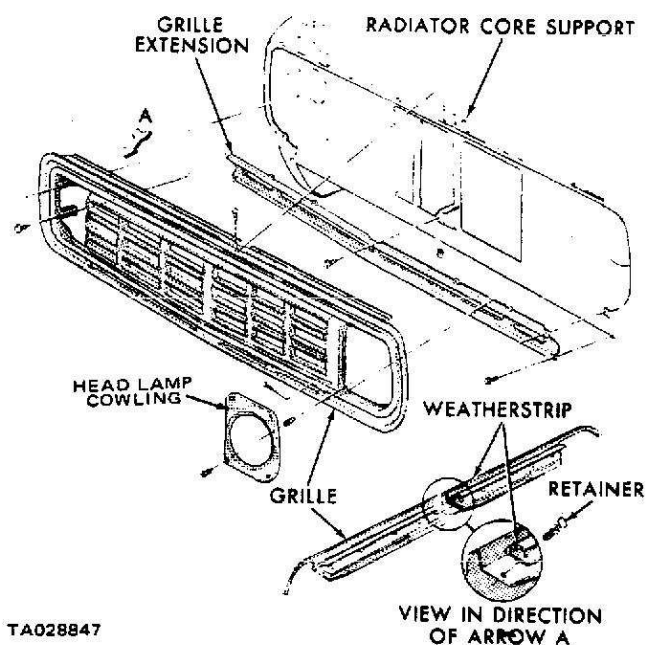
Grille Assembly (Models Manufactured Before August 15, 1976).
